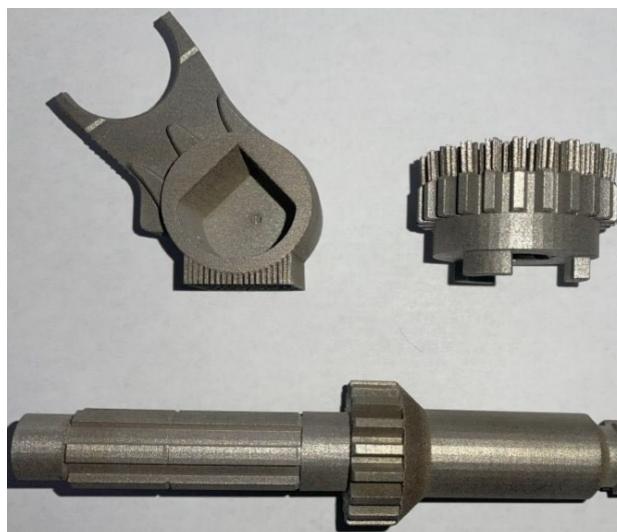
Metal 3D printed shaft, dog gear, and shifter fork
